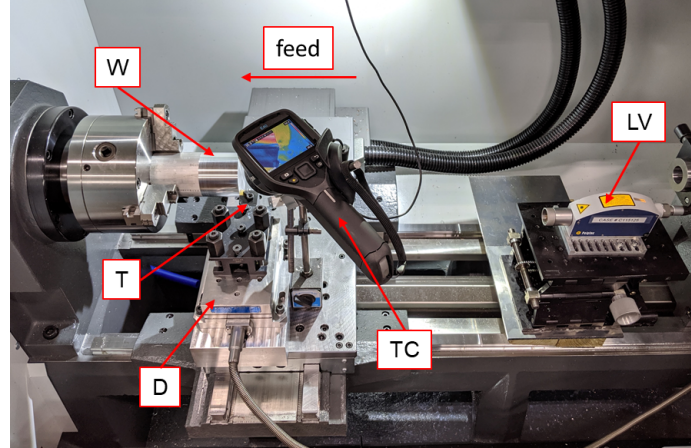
Photograph of turning setup including workpiece (W), dynamometer (D), cutting tool (T), thermal camera (TC), and laser vibrometer (LV).
